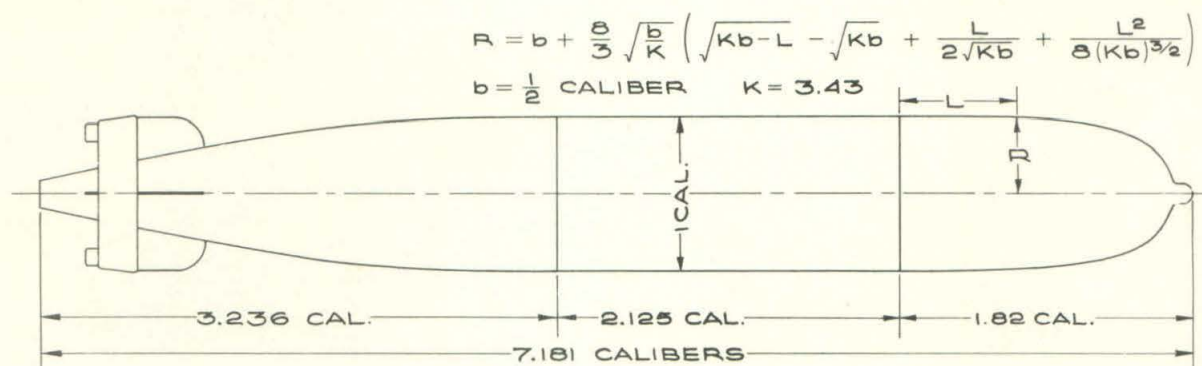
OUTLINE OF MK 13-6 TORPEDO WITH HEAD I
